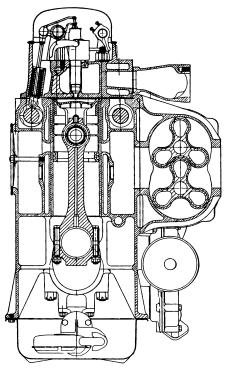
Lateral Cross-section of General Motors Model 3-71 2-Cycle Diesel Engine.
